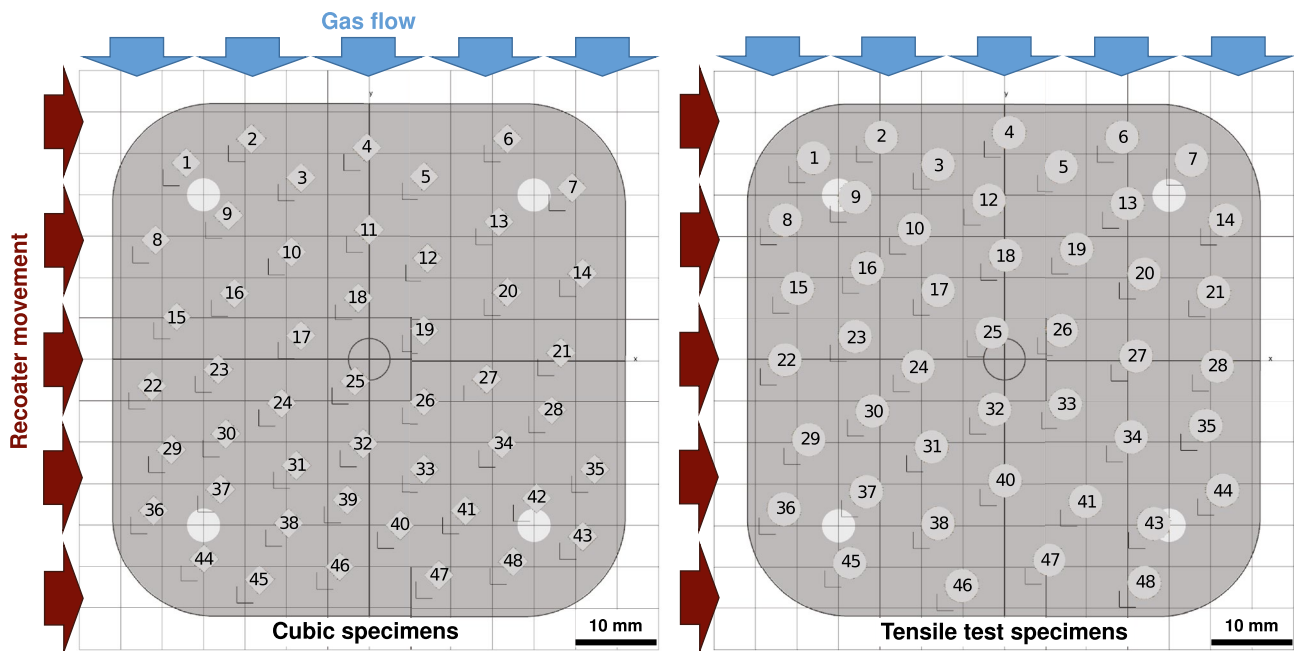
Build layouts for cubic and tensile test specimens with direction of gas flow and recoater movement
